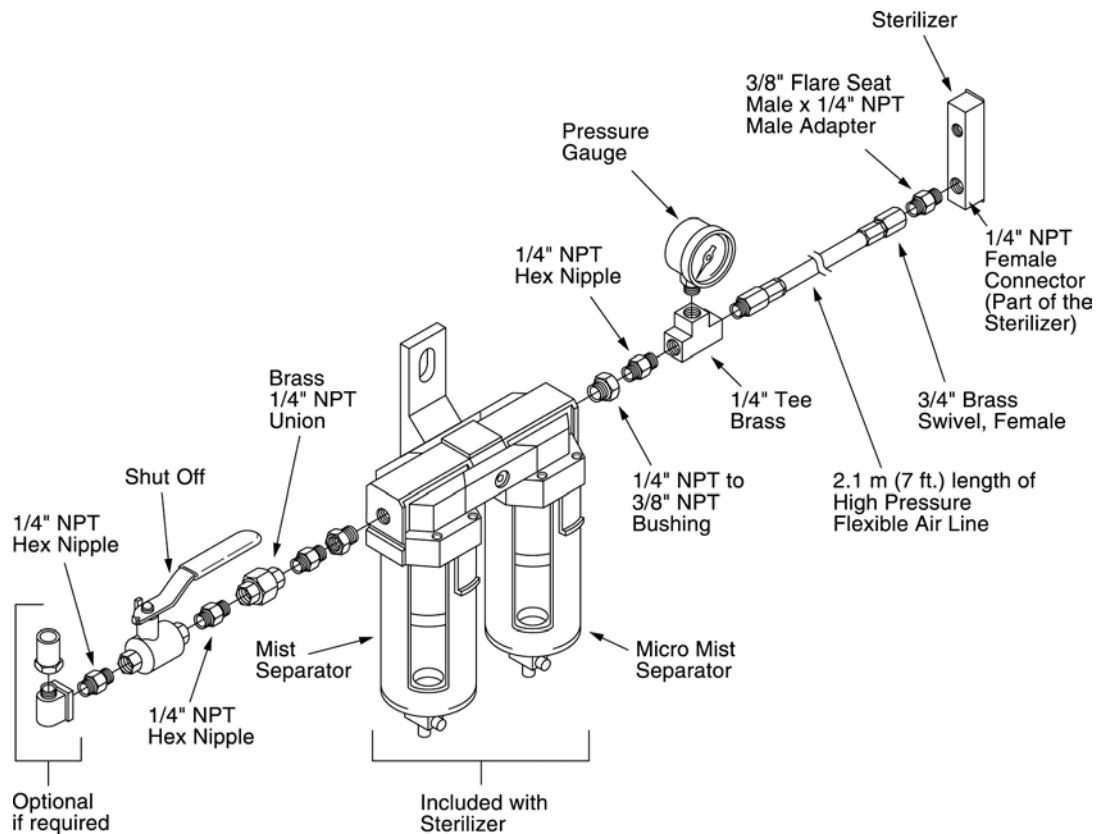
Compressed Air Line Connection Details (Using Installation Kit).
